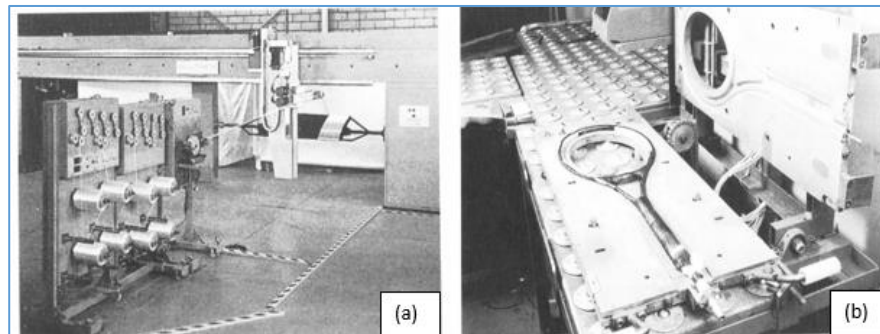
Photographs of (a) filament winding and (b) resin transfer molding production [14].
